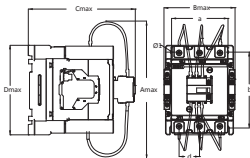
Overall and Installation Dimensions of NXCC-150 ~ 170 Contactor
